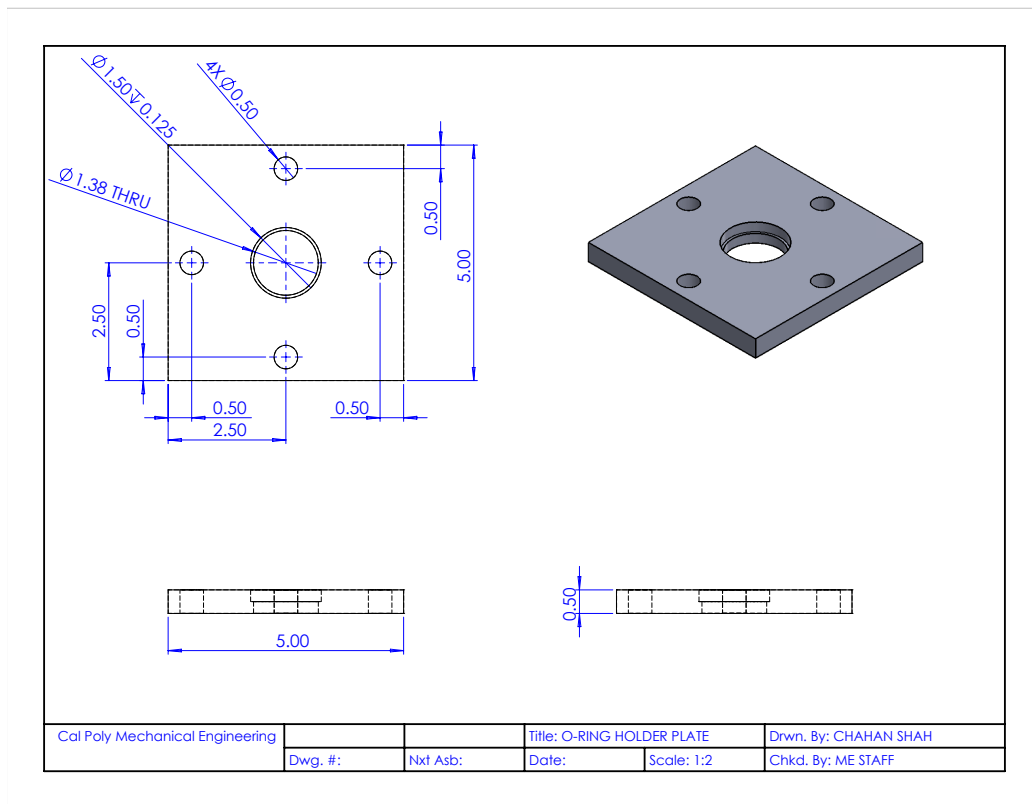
Drawing of o-ring holder plate for the connector plate and shaft.
